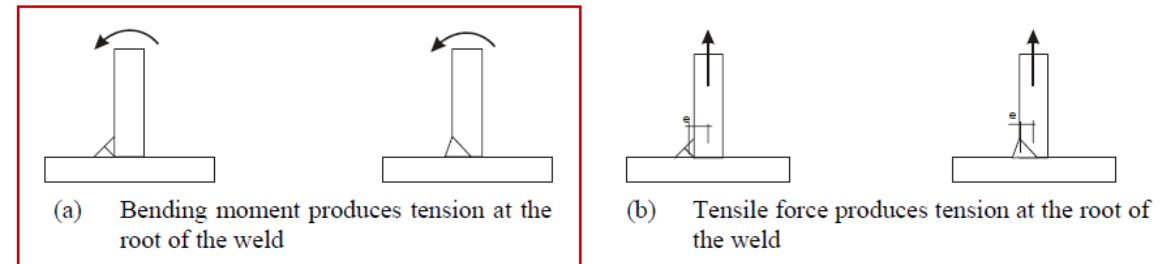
Single fillet welds and single-sided partial penetration butt welds
